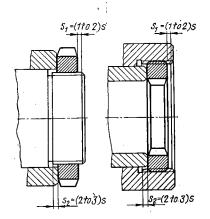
Extra thread in circular-nut assemblies (s is thread pitch)
